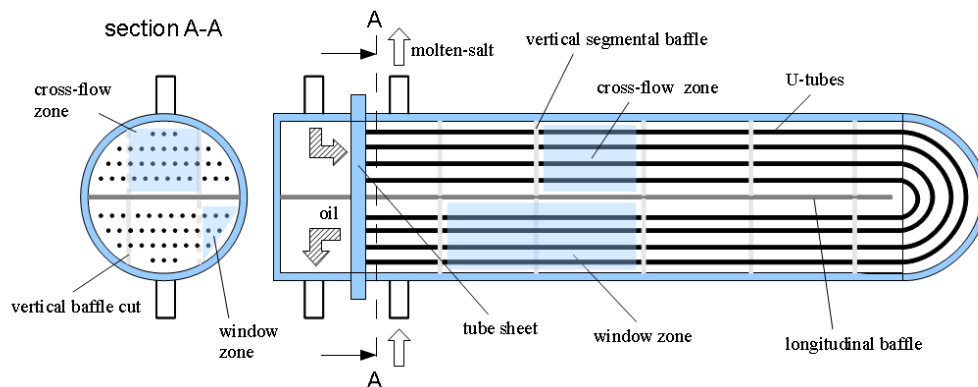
Front view of a TEMA-F type shell-and-tube heat exchanger - vertical segmental baffles - vertical baffle cut [111]
